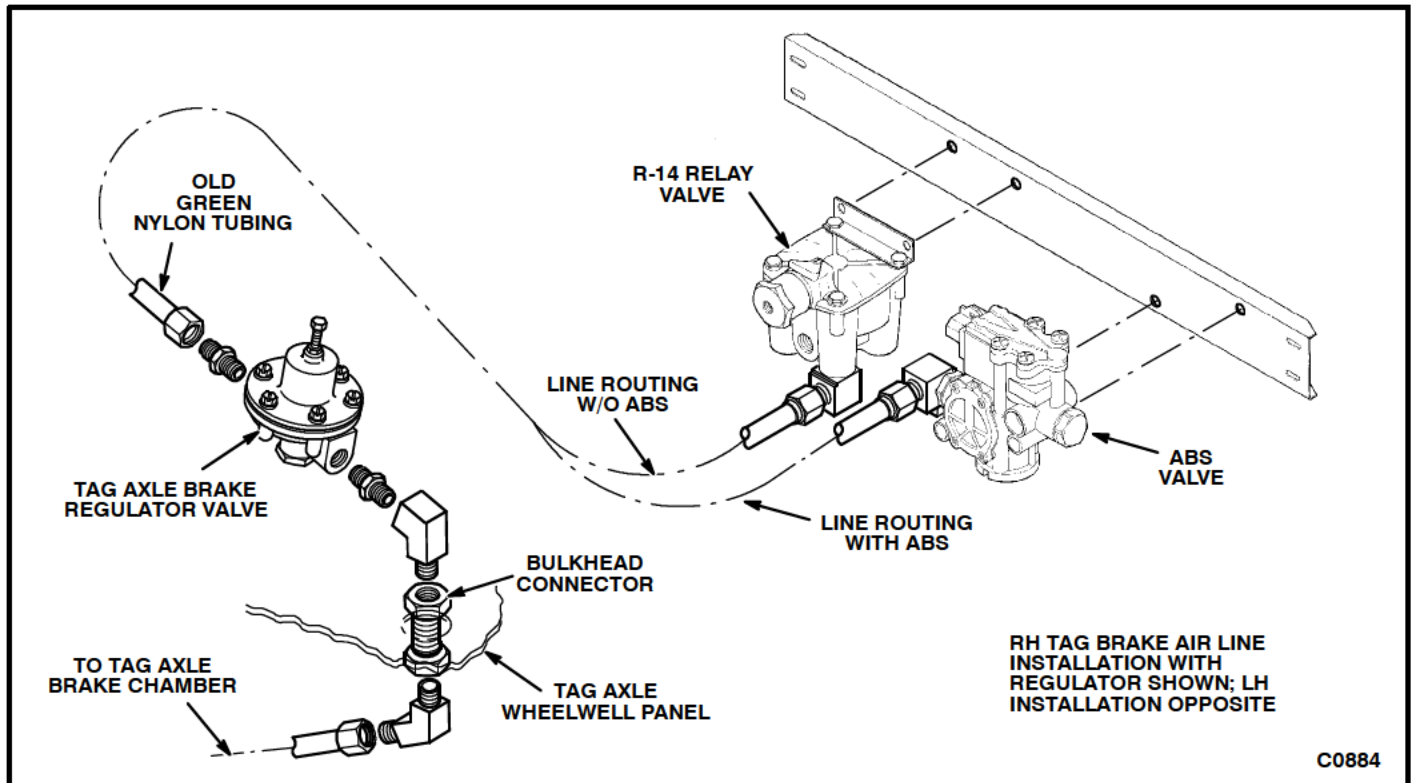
Old Tag Axle Brake Line Installation With Regulator Valve.
